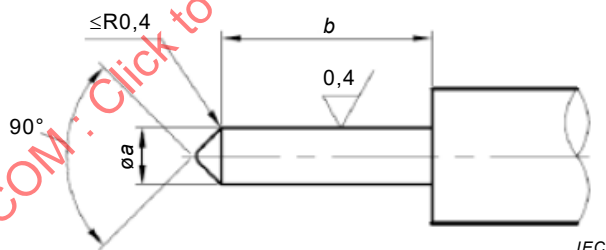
Gauge pin for socket-centre contact (for dimensions, see Table 3)
